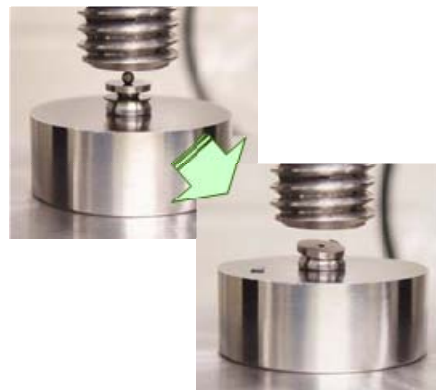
Photographs of test specimen and fixture before (top-left) and after (bottom-right) testing.
